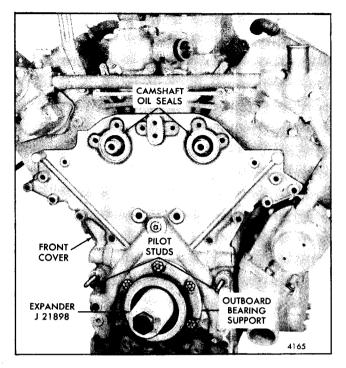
Installing Engine Front Cover - 8V-Engine
